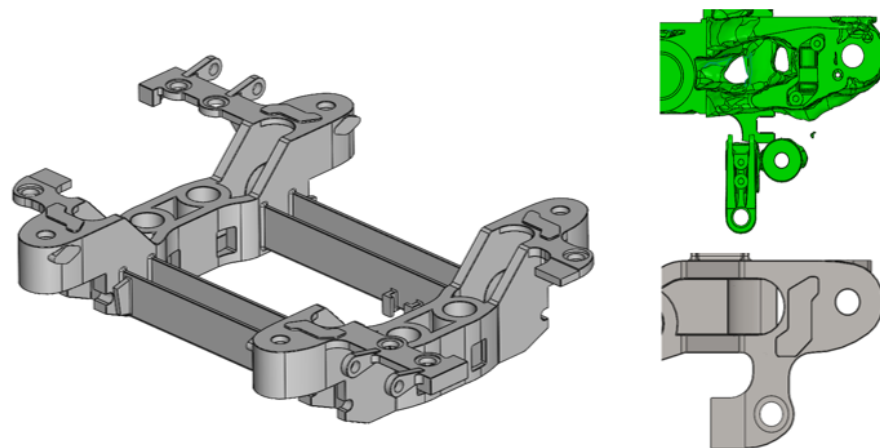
New design of motor bogie frame (CAD view and irregular surface re-building).
